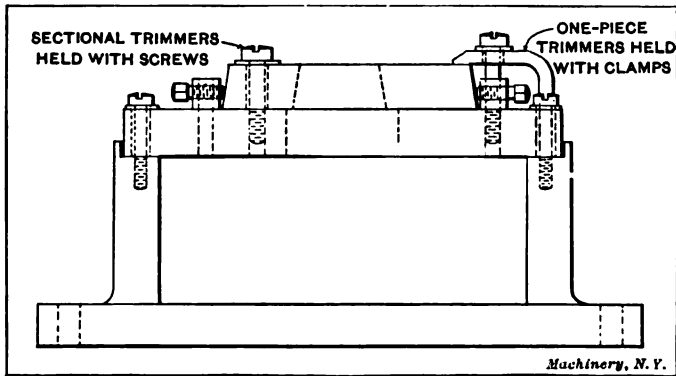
Showing Method of Mounting a Trimming Die on the Bolster and Shoe
